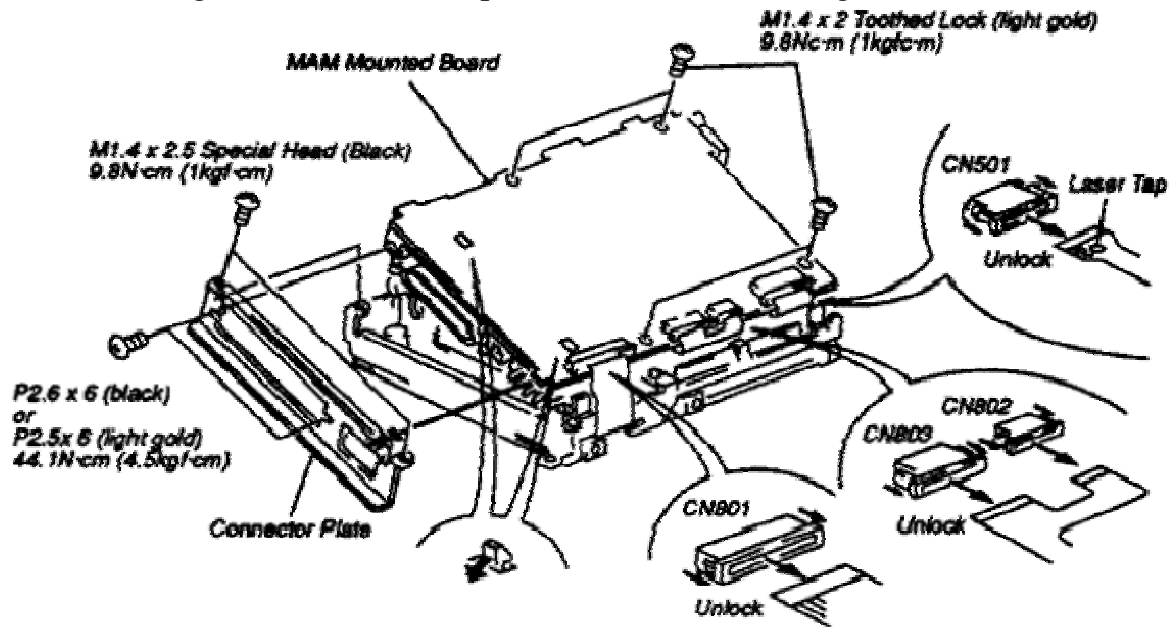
Connector Plate and MAM Mounted Board Replacement
